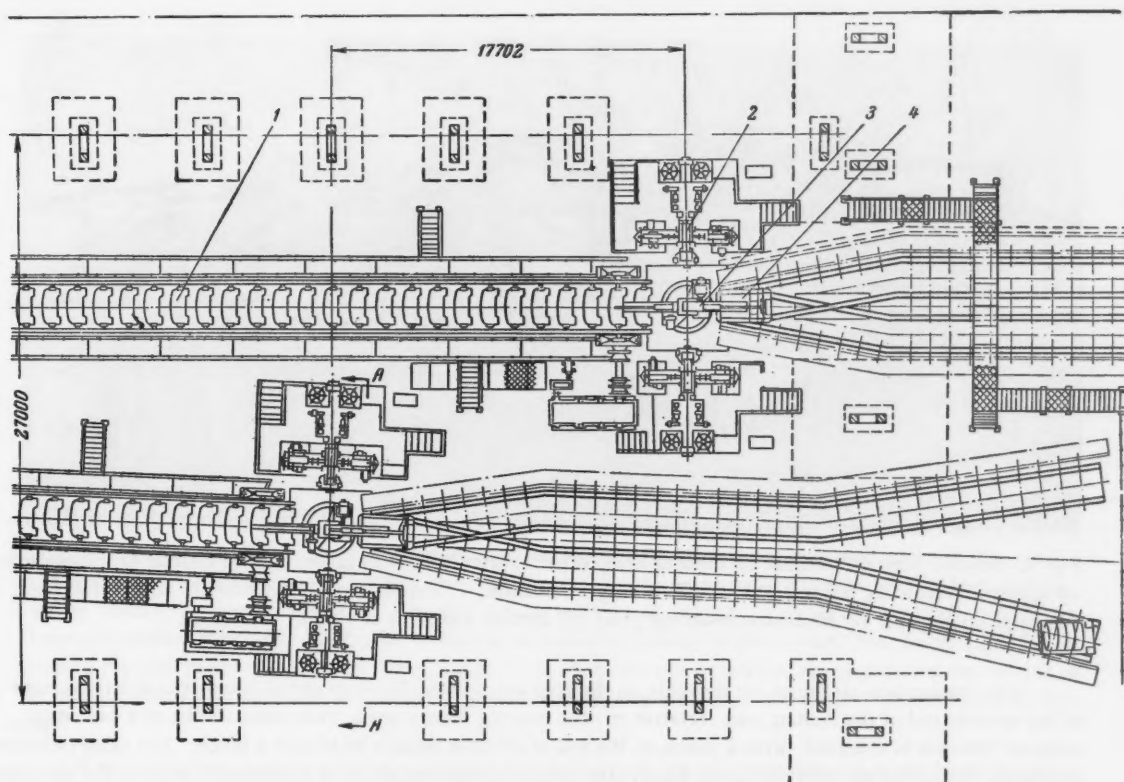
Plan of coil finishing section of mill 300: 1) Cradle conveyer; 2) binding unit; 3) coil lifter; 4) self-propelled stacking car.
